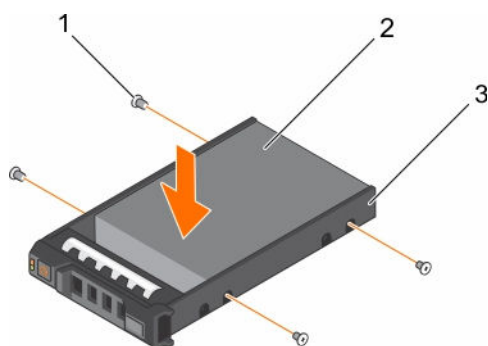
Installing a hot swappable hard drive into a hot swappable hard drive carrier
